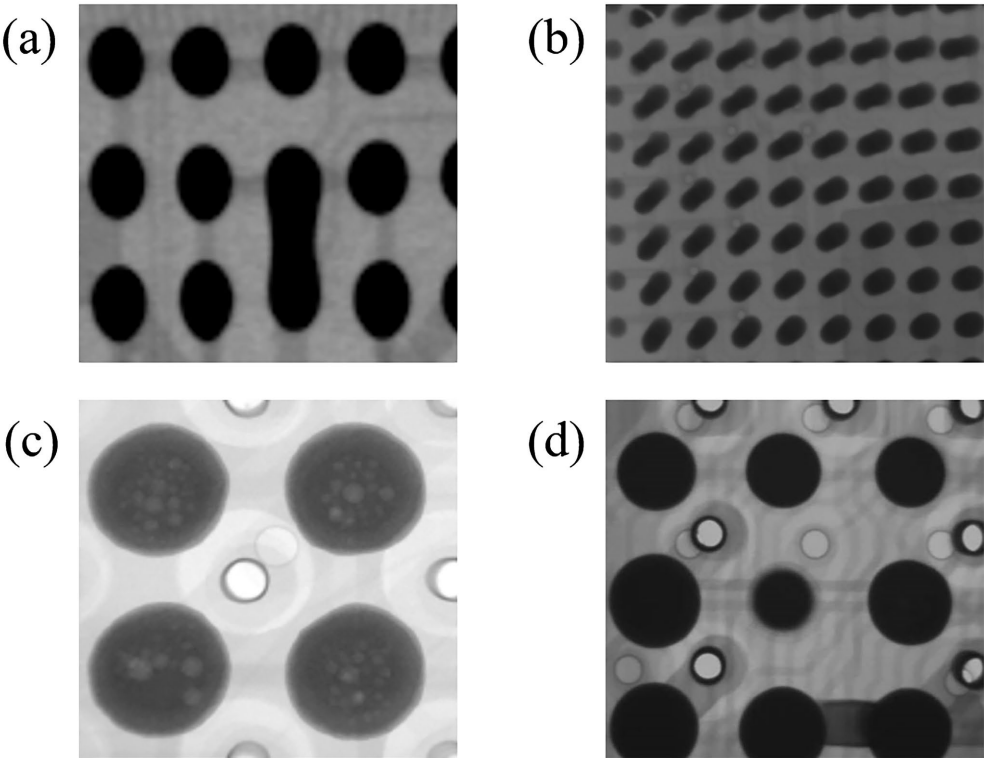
Defect database in BGA welding (a) bridging (b) misalignment (c) void (d) insufficient welding
